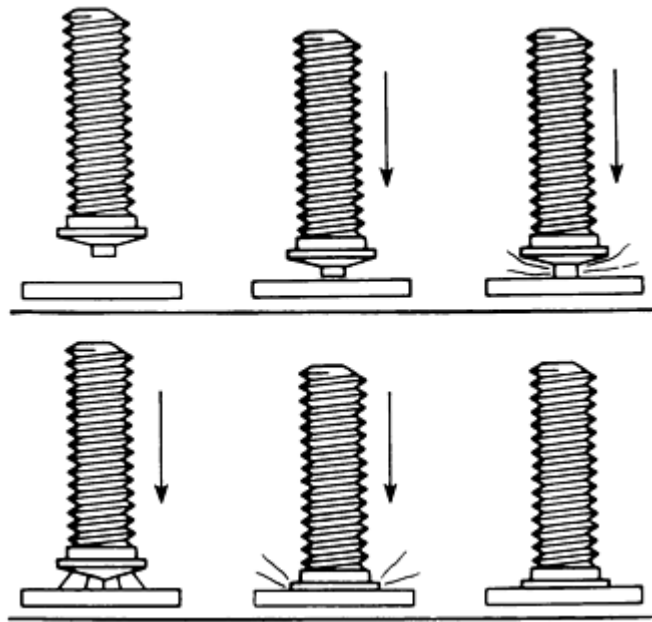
SEQUENCE OF OPERATIONS REQUIRED TO WELD A STUD TO A WORKPIECE USING THE INITIAL GAP METHOD OF CAPACITOR DISCHARGE STUD WELDING
